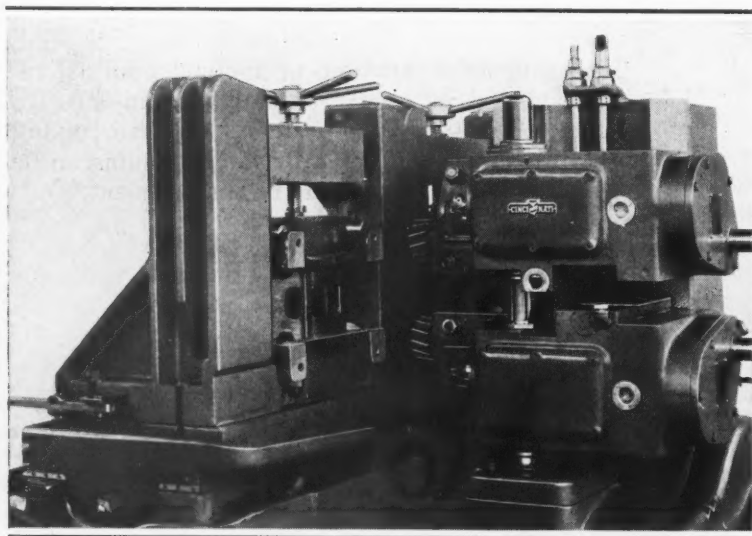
The Cutter-spindle Carriers are Adjustable to Suit the Smallest and Largest Motor Frames
